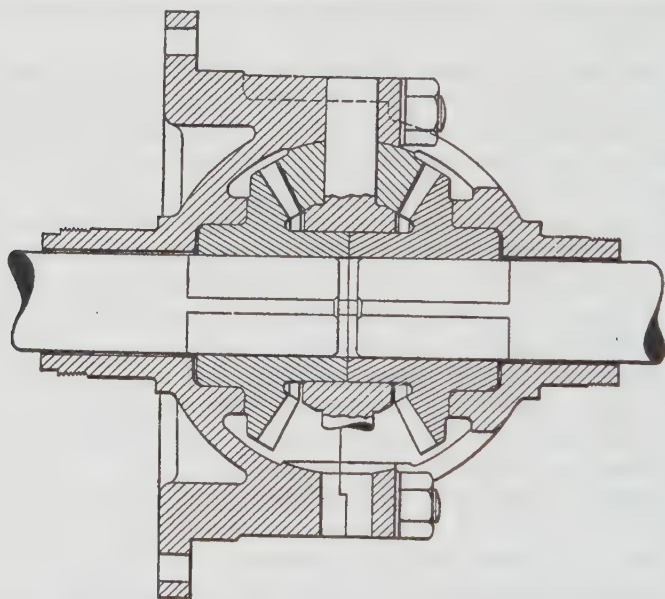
LONGITUDINAL SECTION THROUGH BEVEL TYPE DIFFERENTIAL GEAR.
